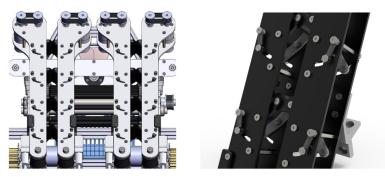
Diagram of spring adjustment with clamping harvesting mechanism.
